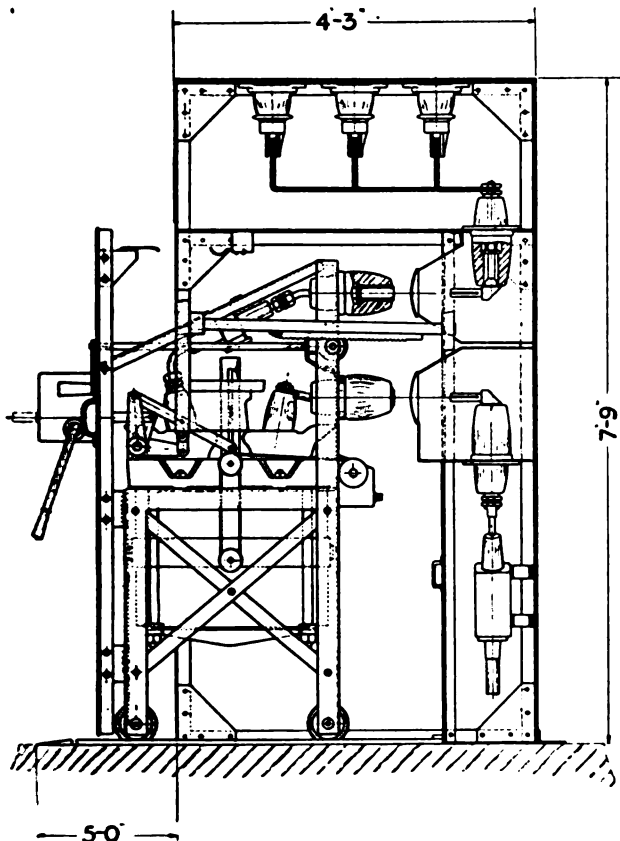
Heavy-duty air-insulated draw-out truck cubicle.
